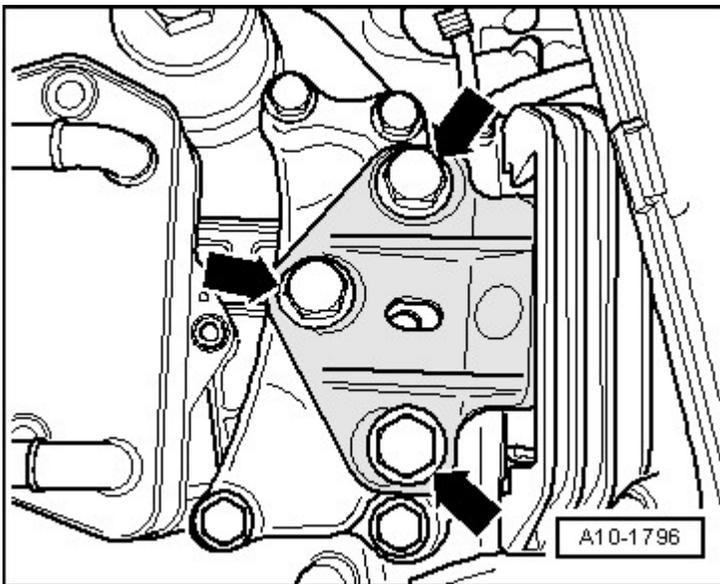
Identifying Engine Mount To Engine Mount Bracket Bolts
